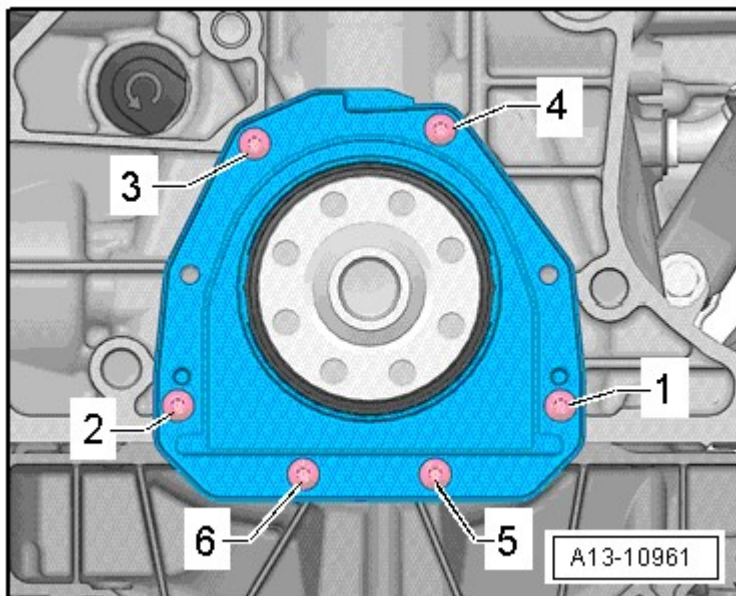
Identifying Transmission Side Sealing Flange - Tightening Sequence, with 6 Bolts
